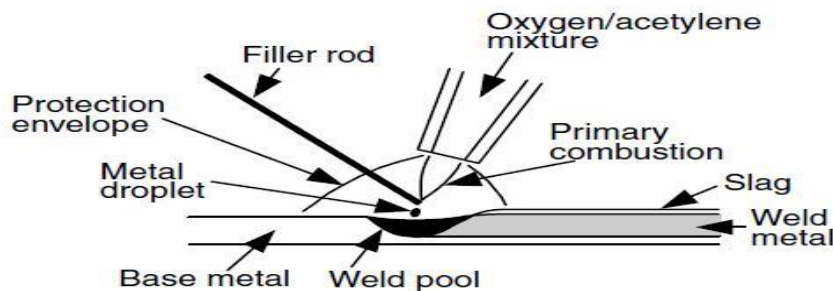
OXY- Acetylene Gas Welding
